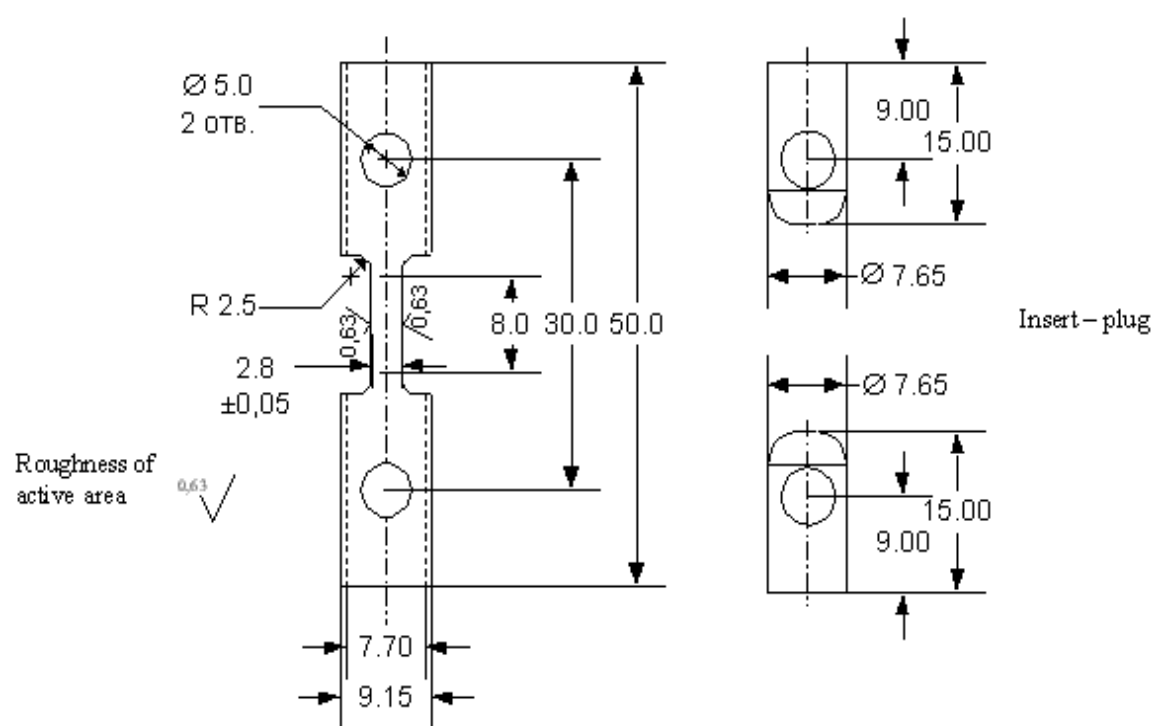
Draft drawing of the longitudinal specimen and insert-plugs
